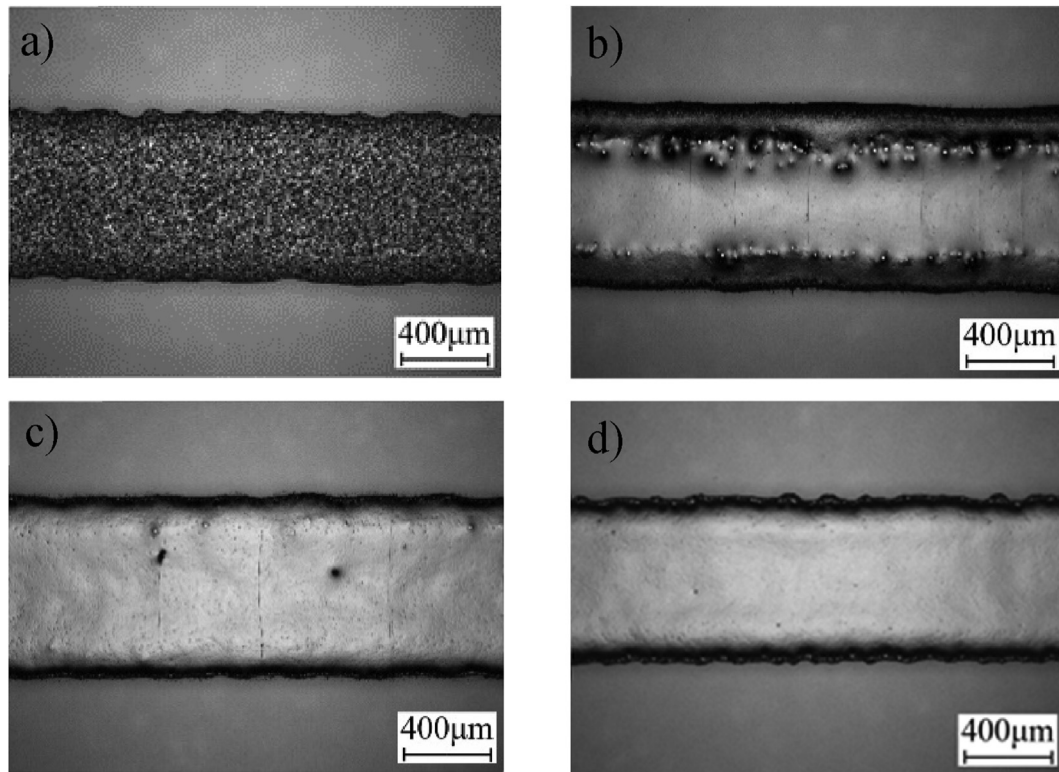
Surfaces of the different glass frit layers (ca.8 μm): (a) Pre-sintering in furnace; (b) Laser direct insufficient pre-sintering; (c) Laser direct sufficient pre-sintering; (d) Full re-sintering by laser.
